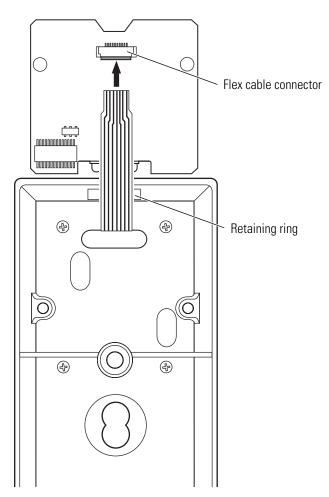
Connecting the flex cable to the B.A.S.I.S. smart card control electronics board
